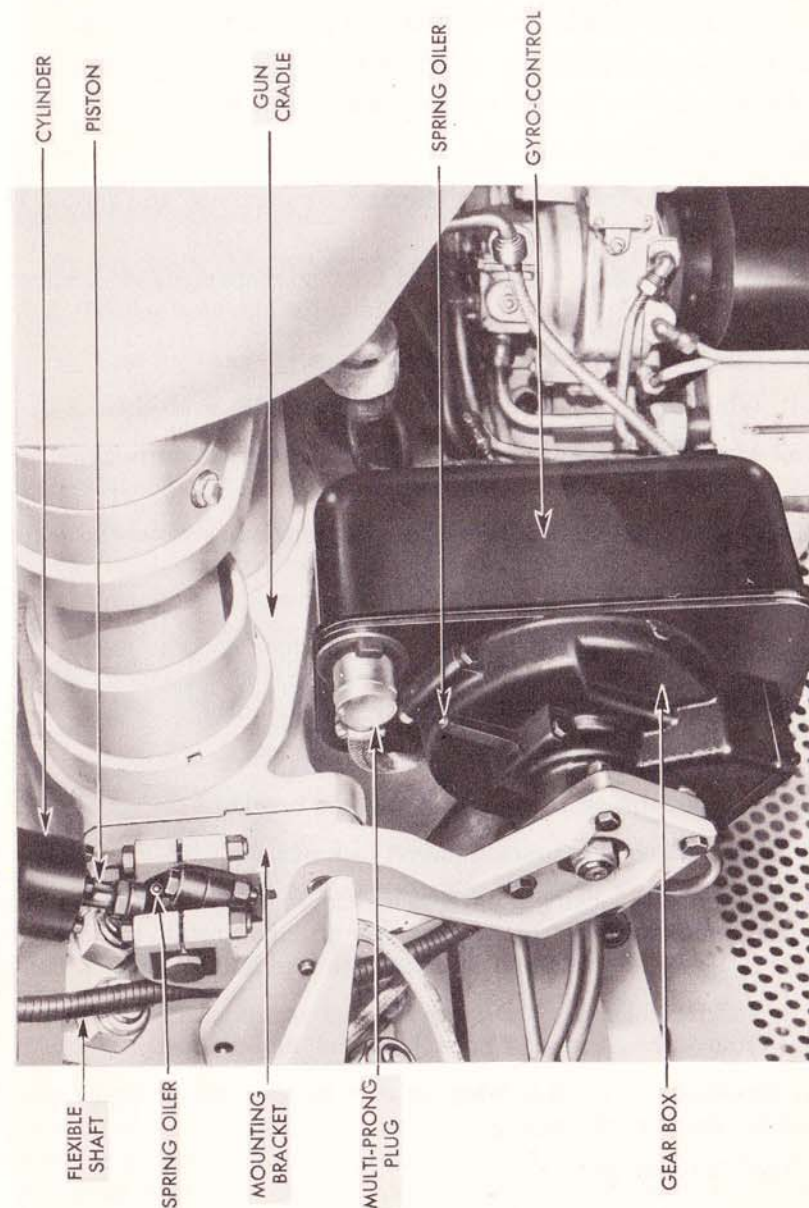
Gyro Control and Gear Box Installed on Gun Mount
